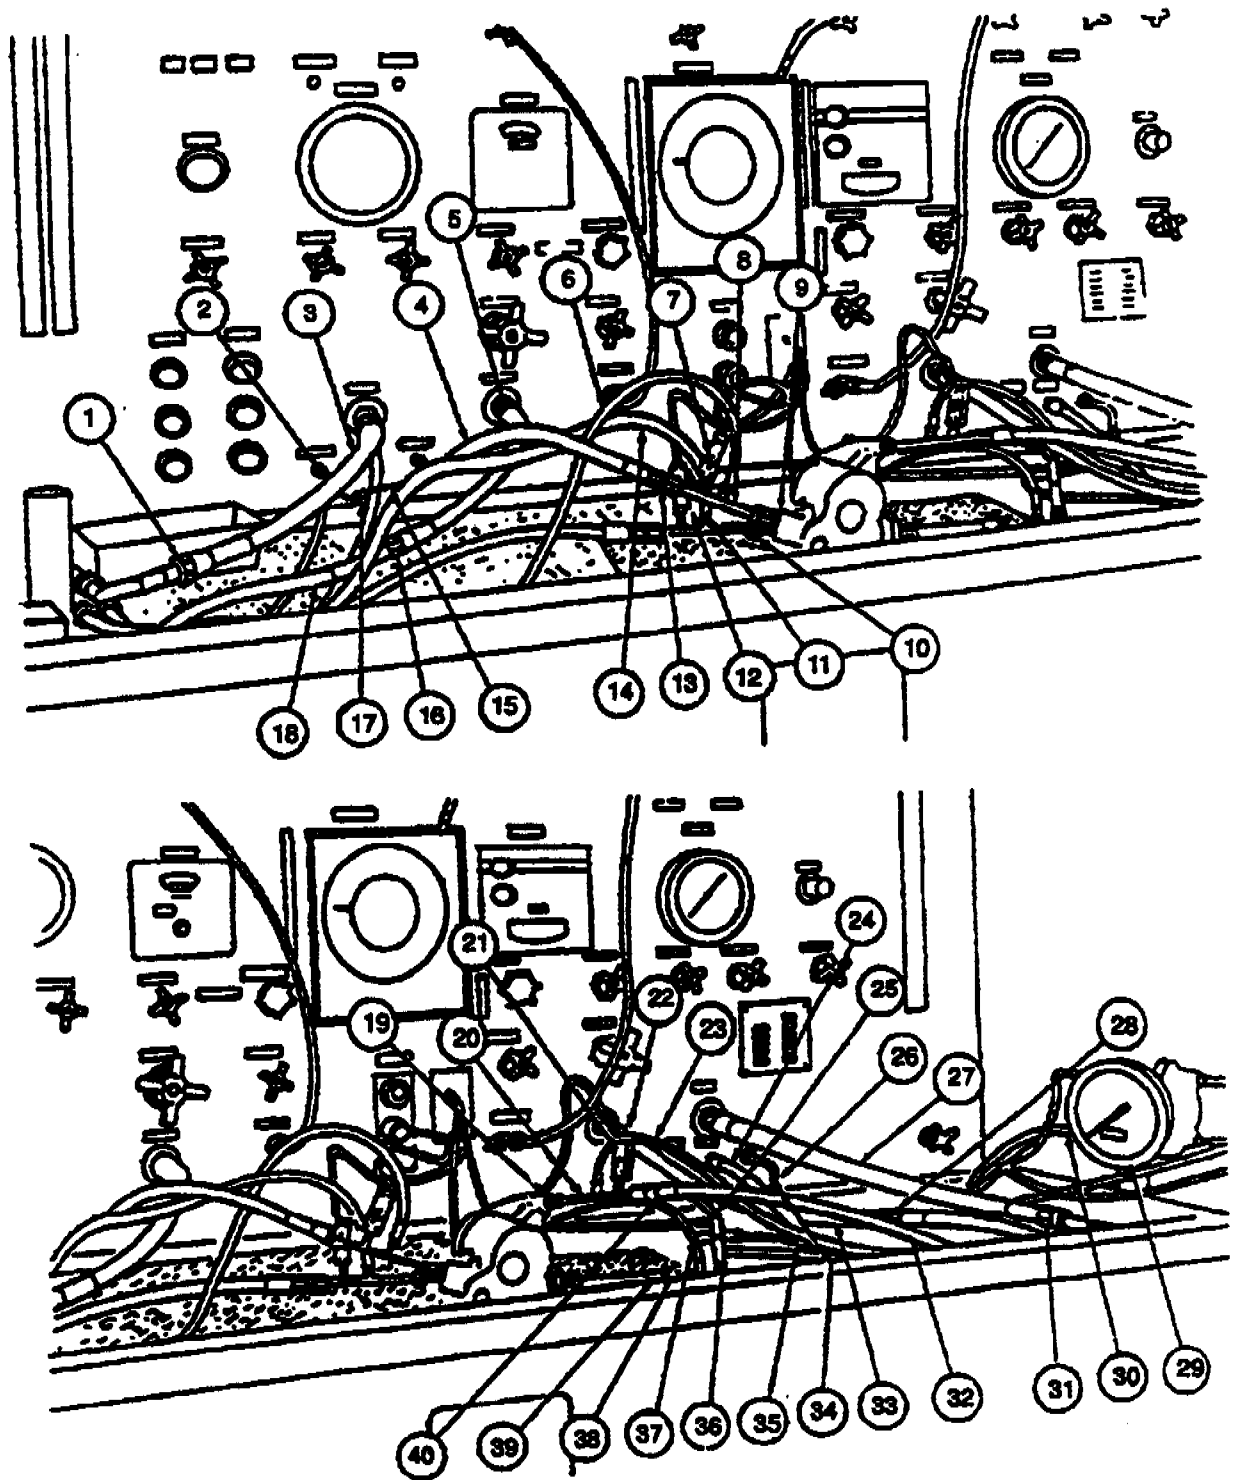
Fuel Heater Flow-Test Connections (Sheet 1 of 2).
